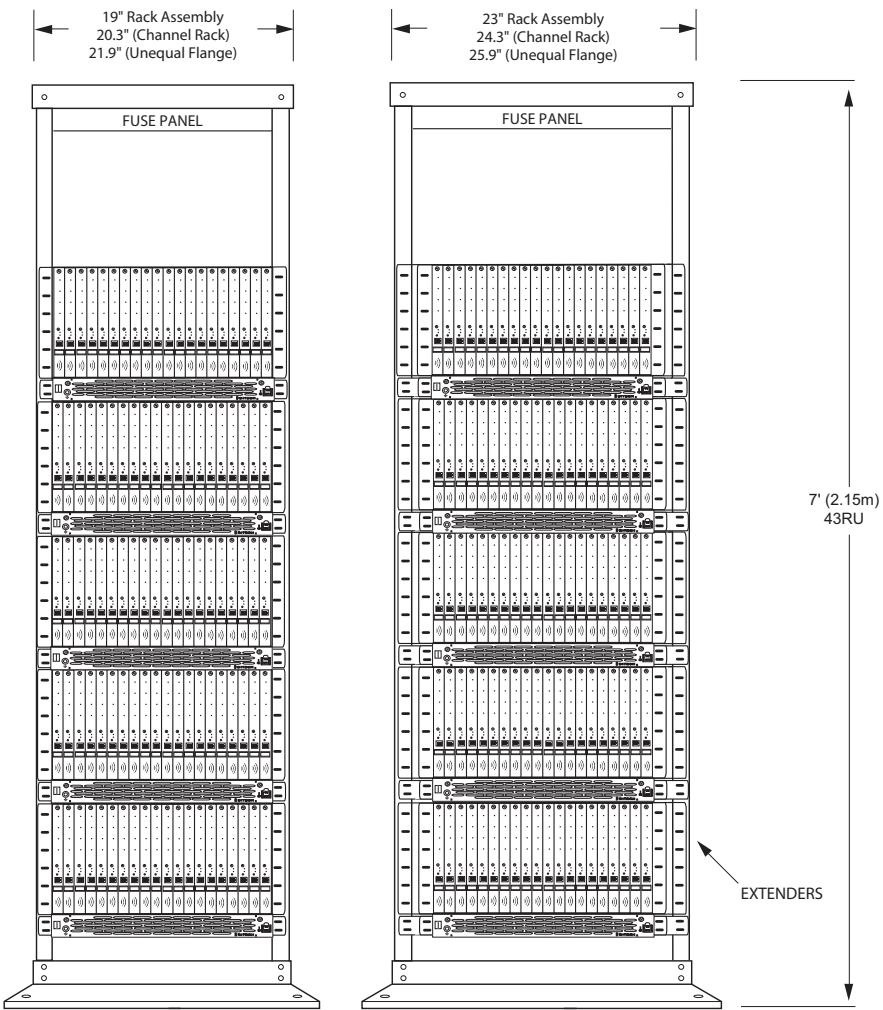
Typical Wire Wrap Shelf Assemblies
